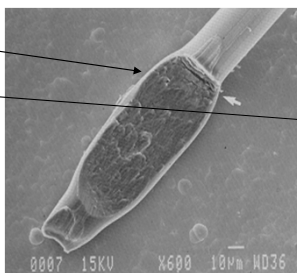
Scanning electron microscope photograph of fatigue fracture of a bond wire. 1275x
